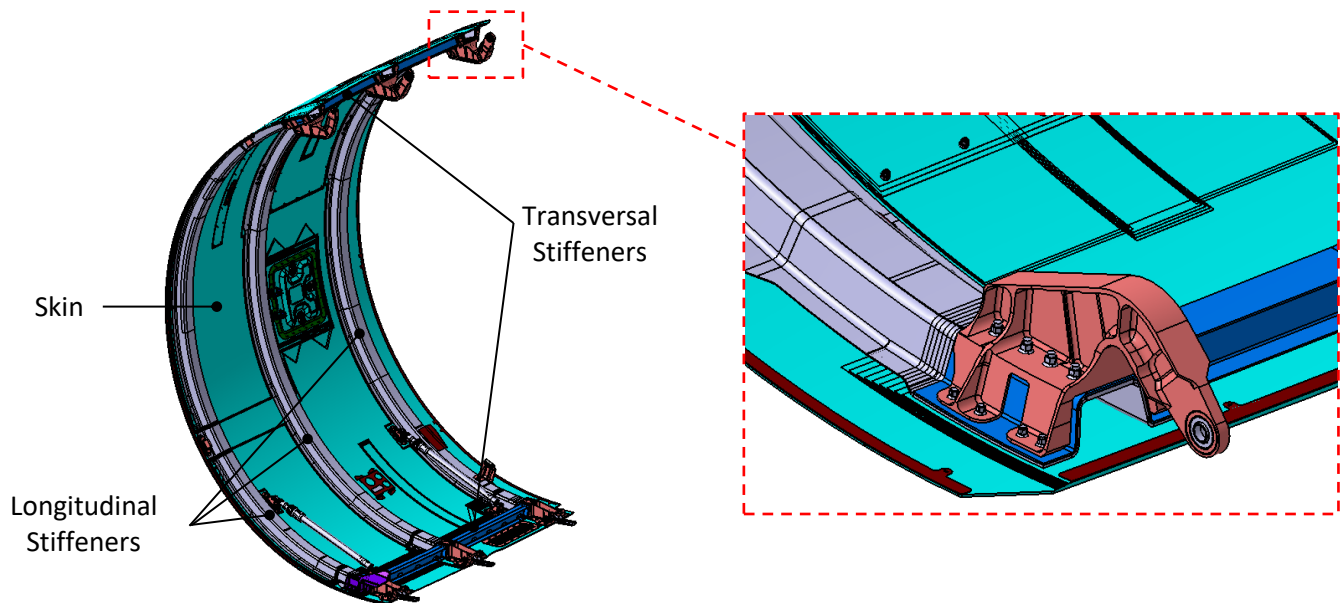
Typical assembly of the Fan Cowl door components (skin, stiffeners and hinges).
